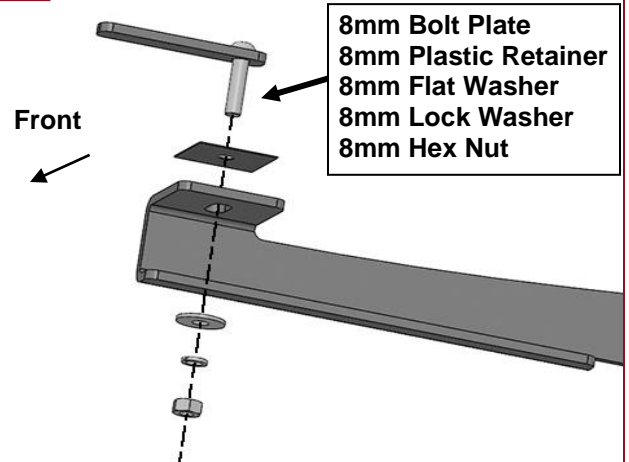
Passenger/Right Front Mounting Bracket attached to inner body panel
